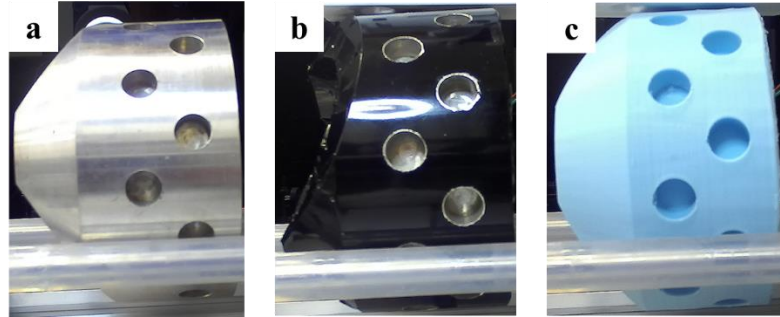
Experimented workpiece types (a) Metallic surface. (b) Metal surface wrapped in black vinyl film. (c) 3D printed with blue PLA plastic filament.
